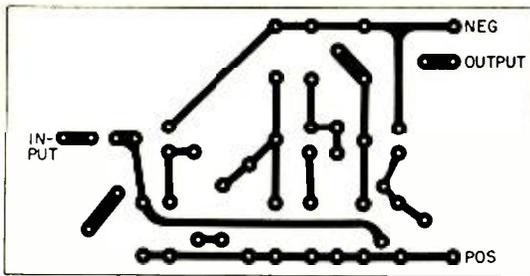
Copper side of circuit pattern used for crossovers. Actual size of the PC board used is 3 x 6 inches. Draw or enlarge optically. Fig. 6 below shows the completed and wired 3-way crossover. Use table below for crossover values.
